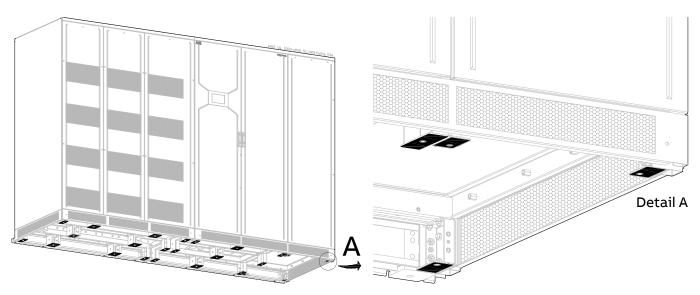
MegaFlex 1000 to 1600 - Fixing of the UPS cabinet on the floor
